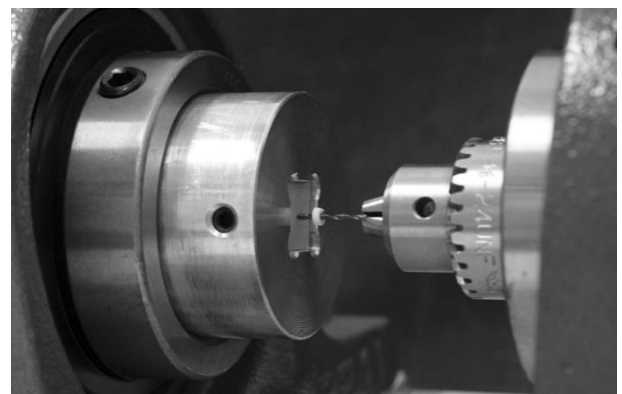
The pre-drilled pilot-hole was construction using the drill bit with a color-coded stop.
